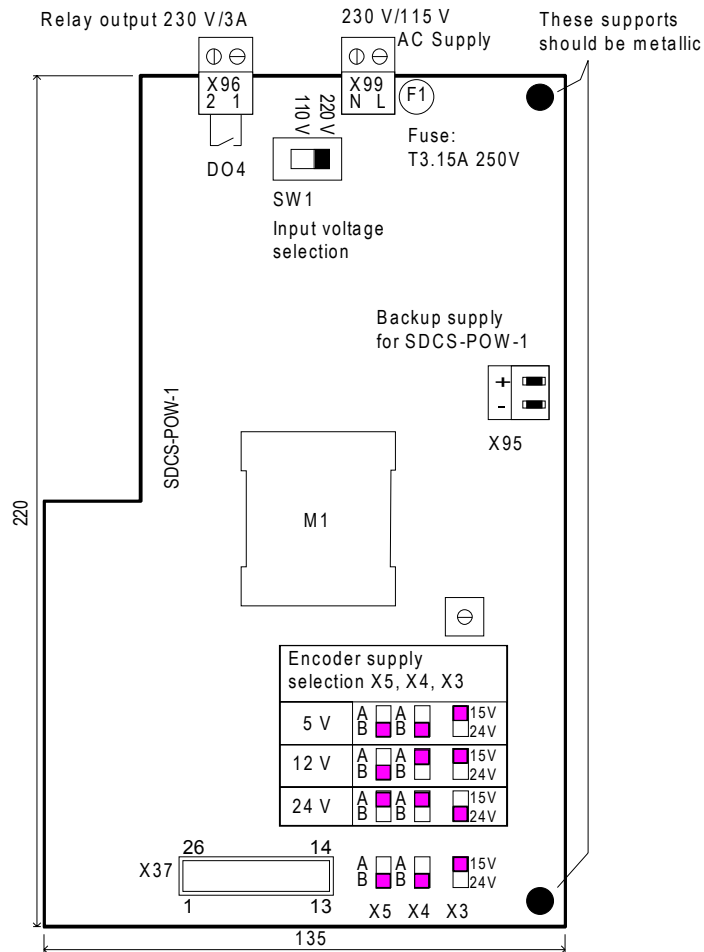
Layout of the power supply board SDCS-POW-1 (Revision B or later) and jumper settings.
